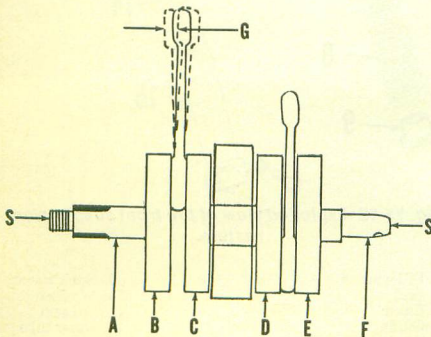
Refer to text to check crankshaft for correct assembly or wear.
